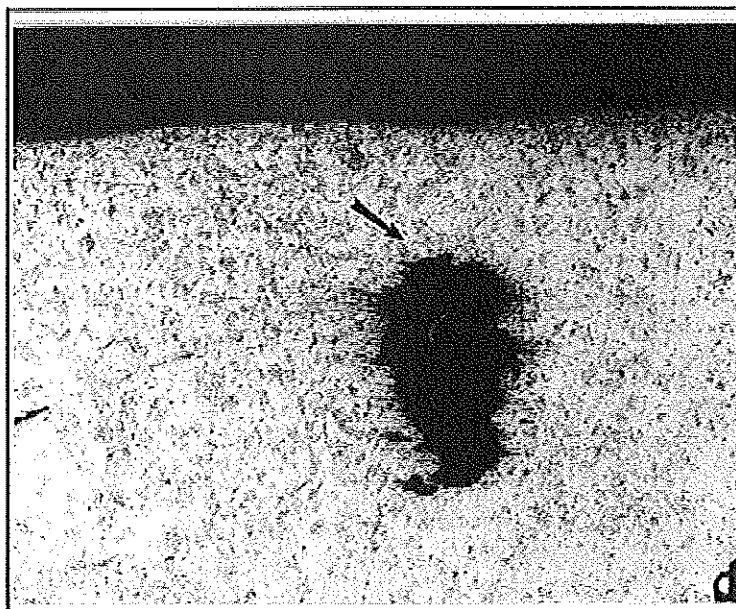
Another defect seen on the forge weld. this is most likely due to a slag inclusion. Index marks on the outside of the picture indicate location of forge weld (both pictures 15X, nital etch).
